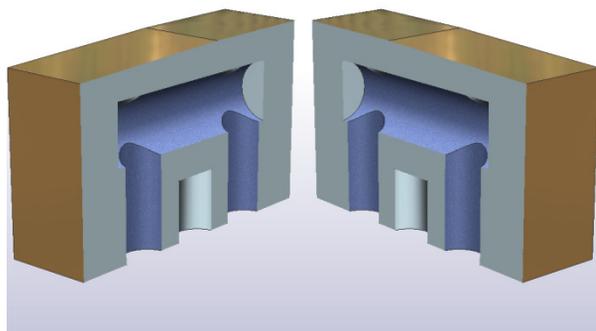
3D-CAD model showing the cooling drills of the scraper brackets. The overall length of the bracket is 50 mm.
